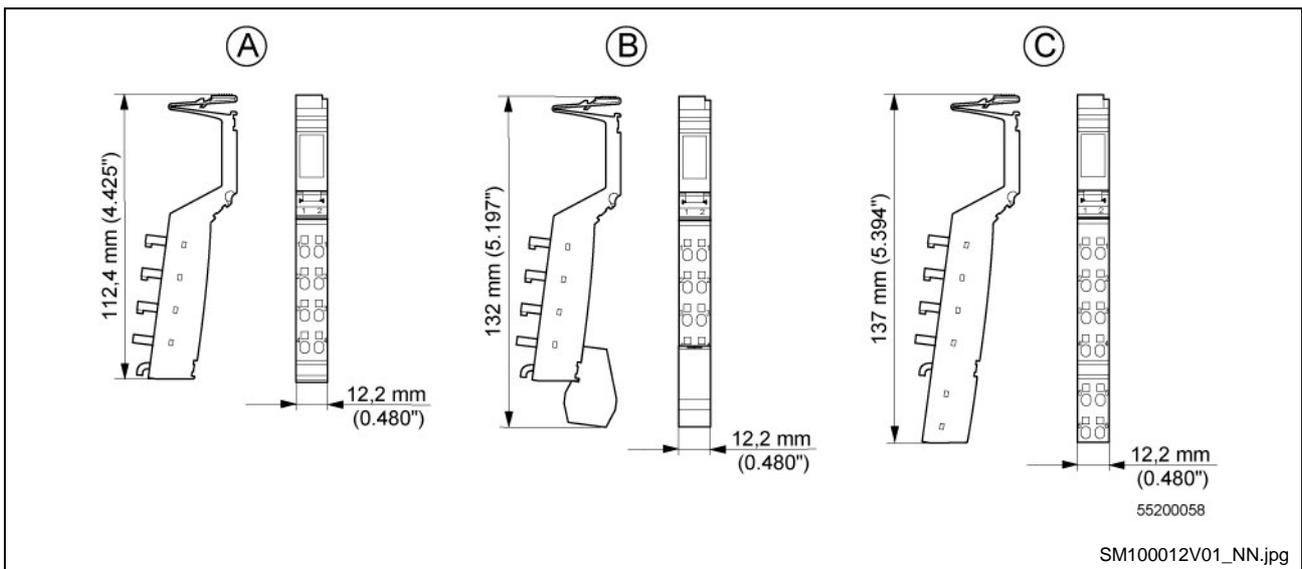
Dimensions of the electronic sockets (eight-fold enclosure)
